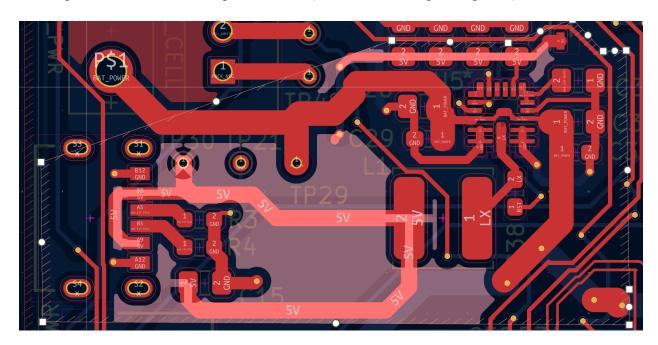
PCB Layout Front 5V Copper Zone
